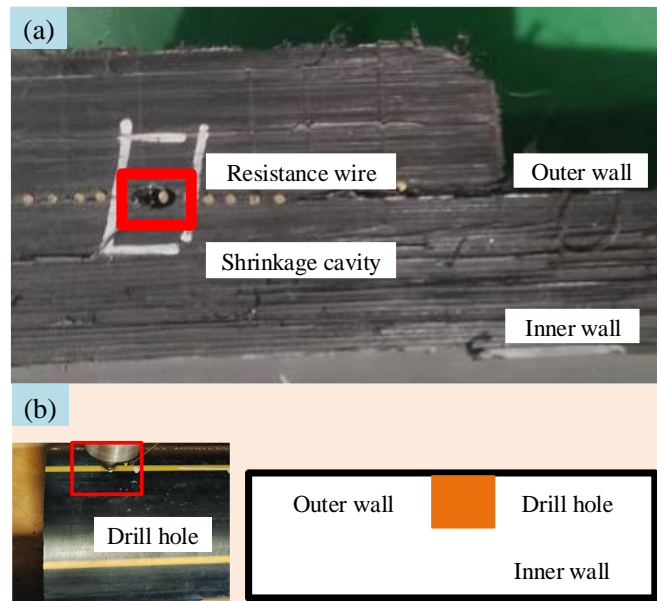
The actual hole and the processing map; (a) Section of electric fusion butt welding, (b) Schematic diagram of hole processing.
